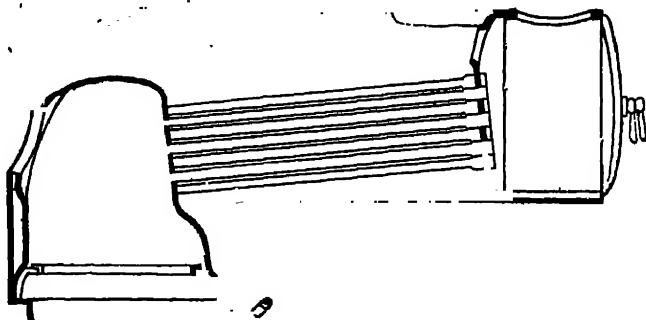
Locomotive-type Boiler for Steam Wagons
